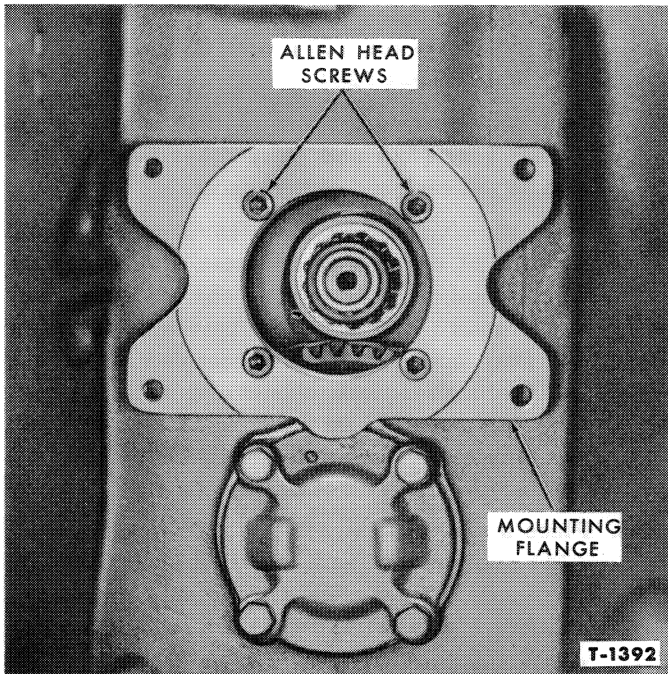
Mounting Flange Installed in Tractor Transmission Case
